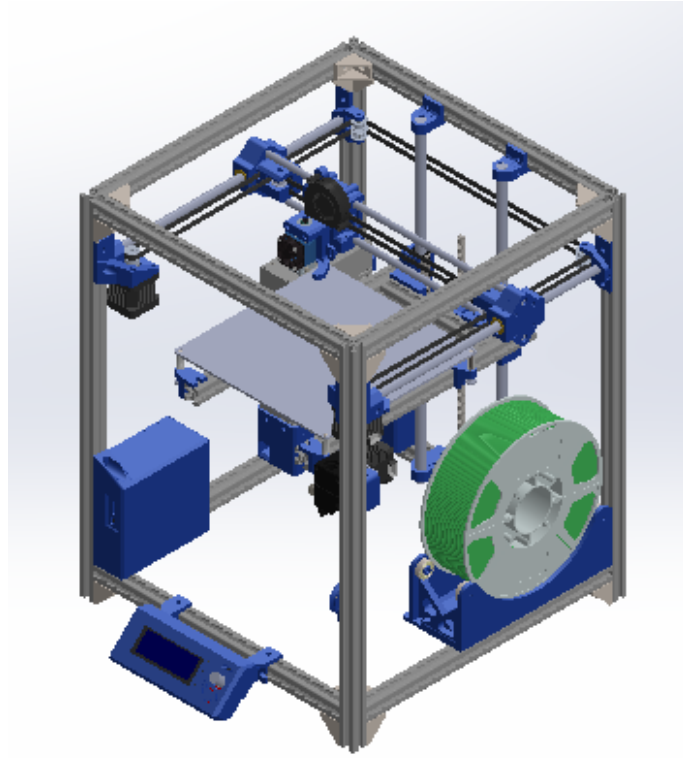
Isometric View of 3D Printer Prototype Version 1.
